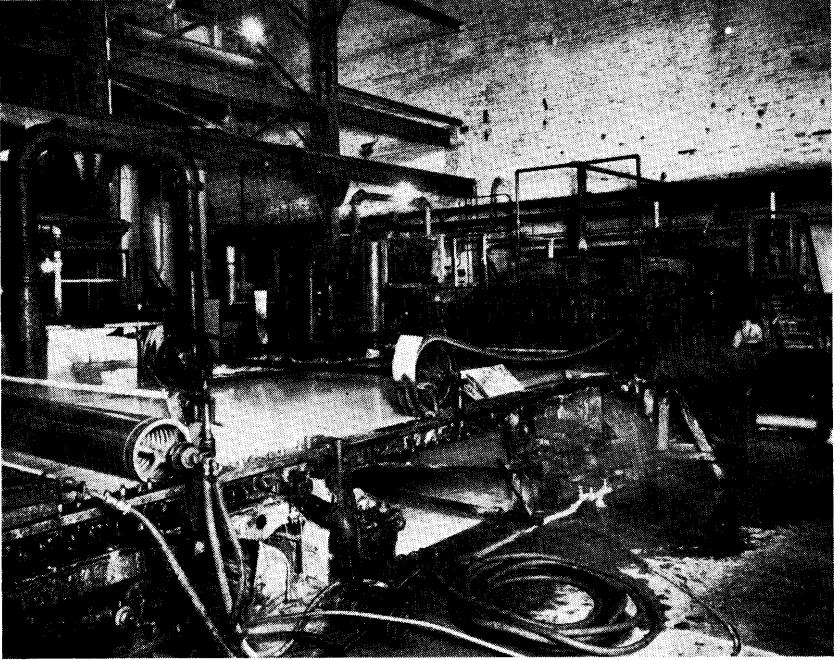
WET END OF FOURDRINIER PAPER MACHINE
